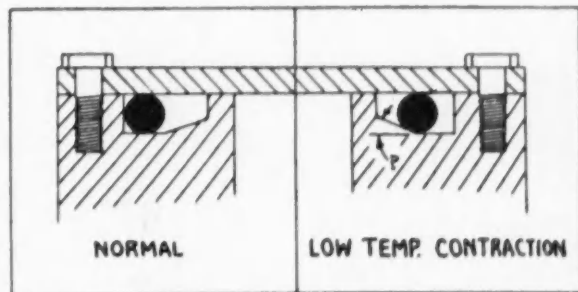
Possible design: as the o-ring shrinks it tends to wedge itself between the two surfaces and make a better seal.
